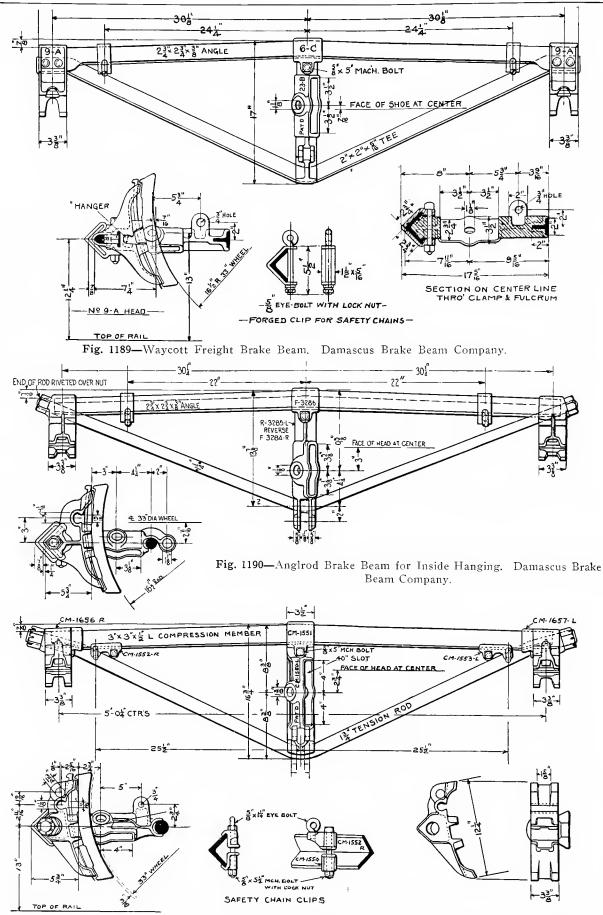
Waycott Brake Beam with Rigid Heads for High Speed Four-Wheel Trucks. Damascus Brake Beam Company.
